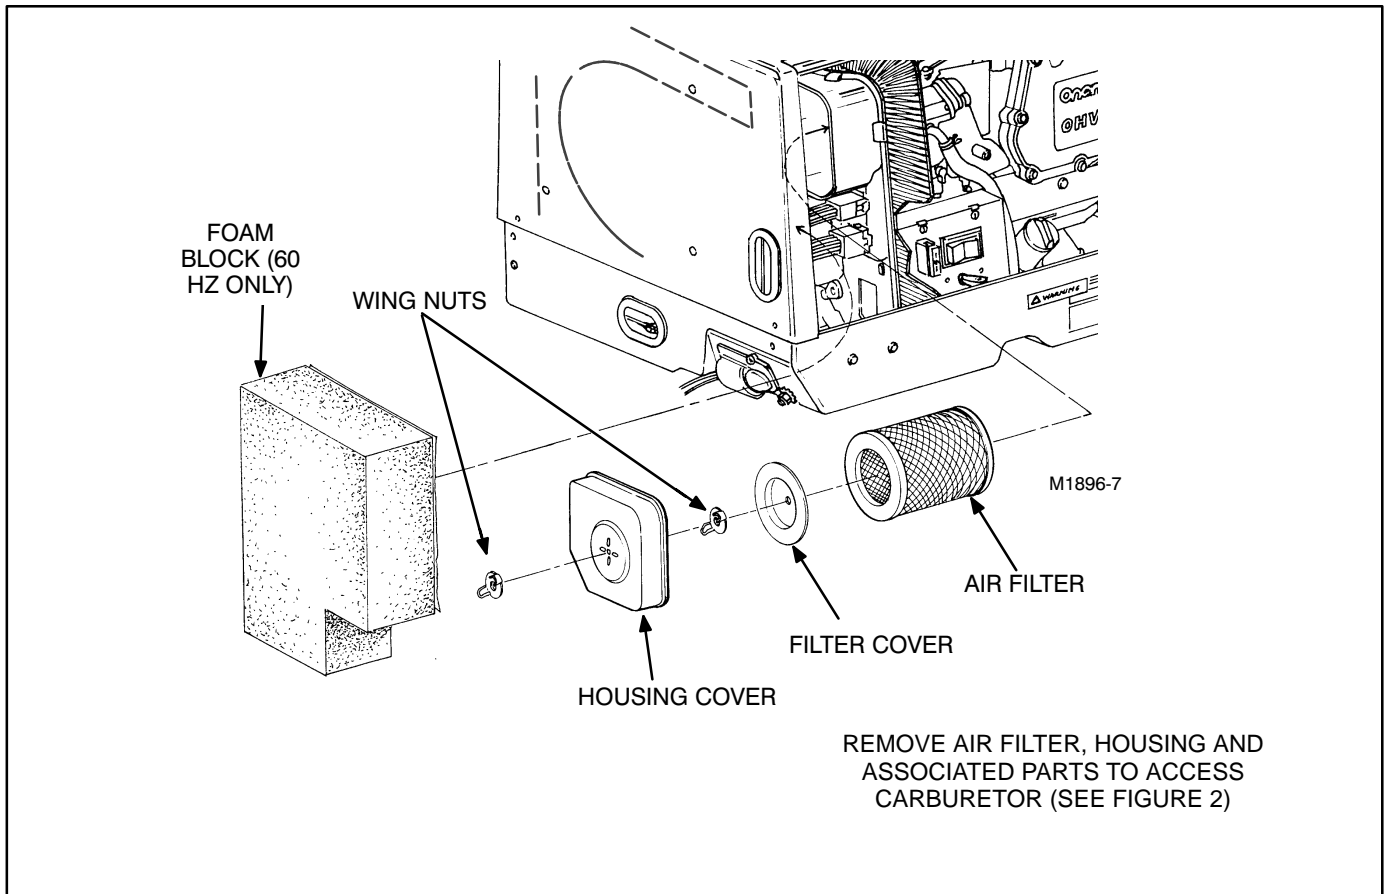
AIR FILTER AND PREHEATER ASSEMBLY
